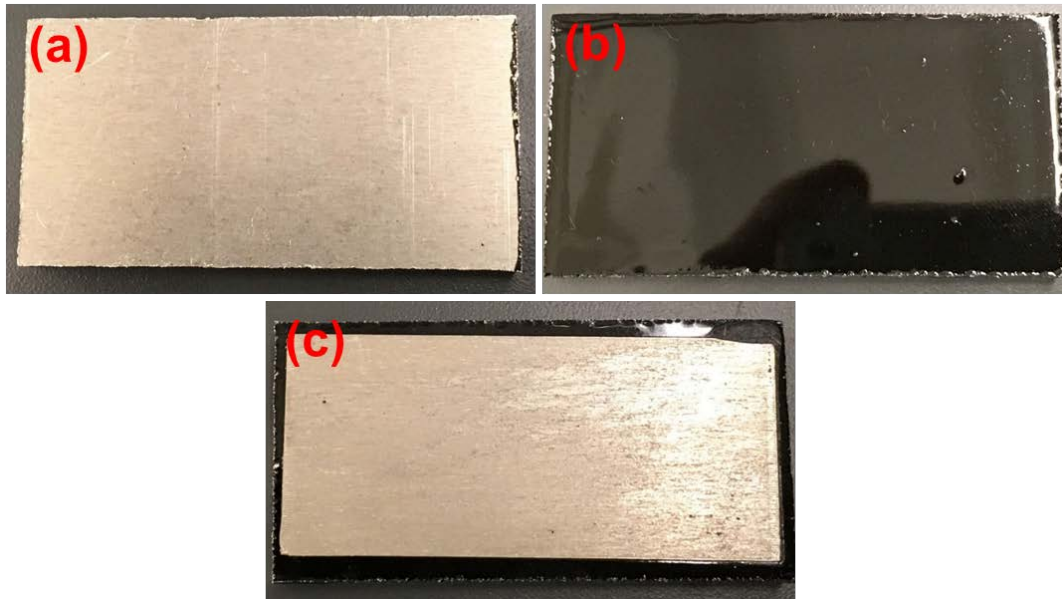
Optical images of the Al alloy surfaces (a) as-received, (b) covered with black paint, and (c) after laser cleaning using CW fiber laser scanning to remove the black paint.
